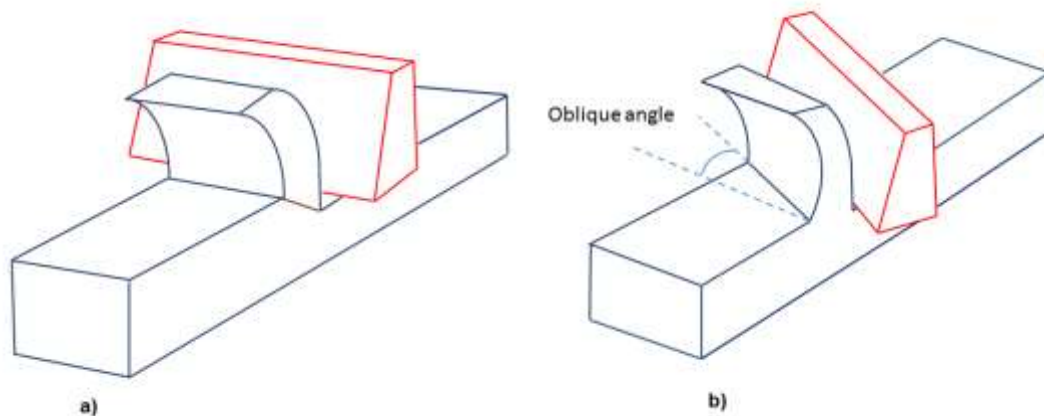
a) Orthogonal Cutting b) Oblique cutting
